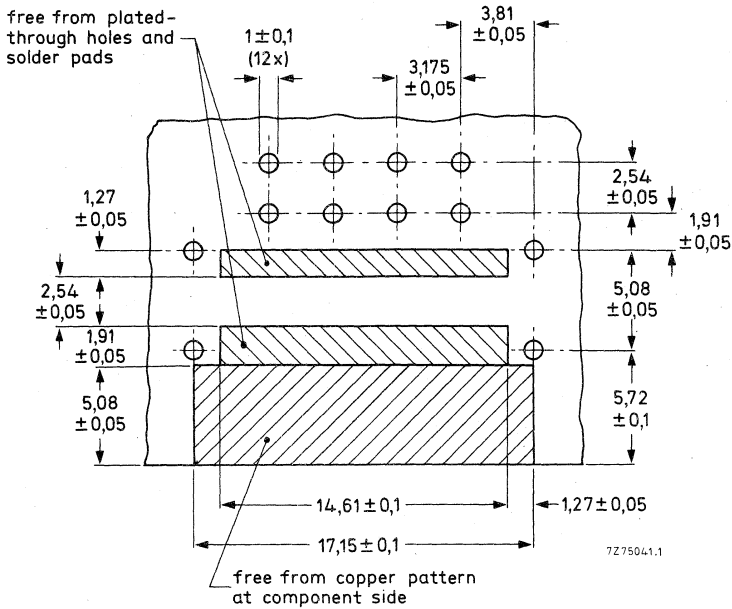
Hole pattern for the spring contact box with 8 pins.
